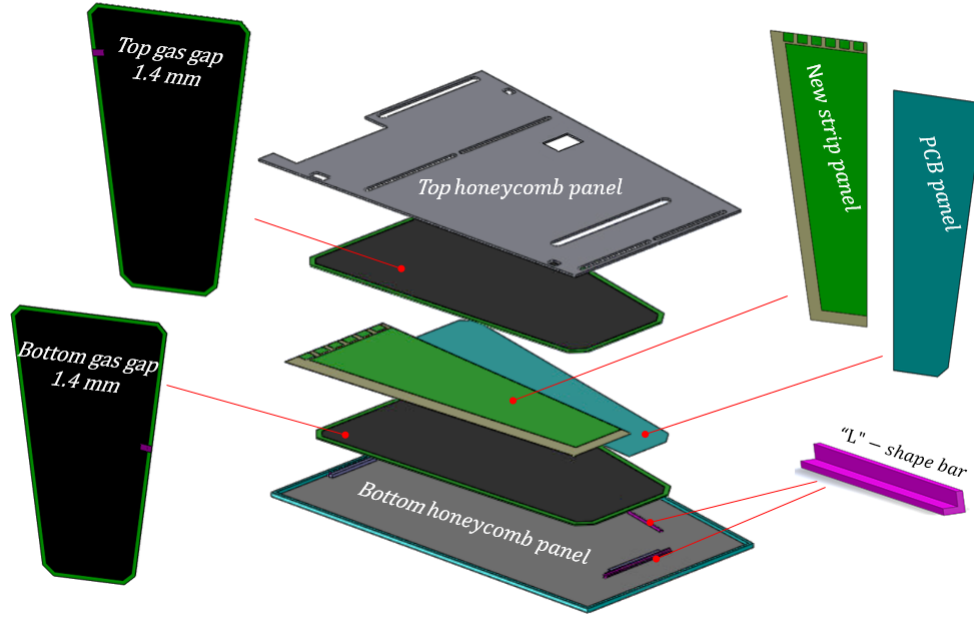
Exploded view and final design of the second type of the RE4/1 detector prototype.
